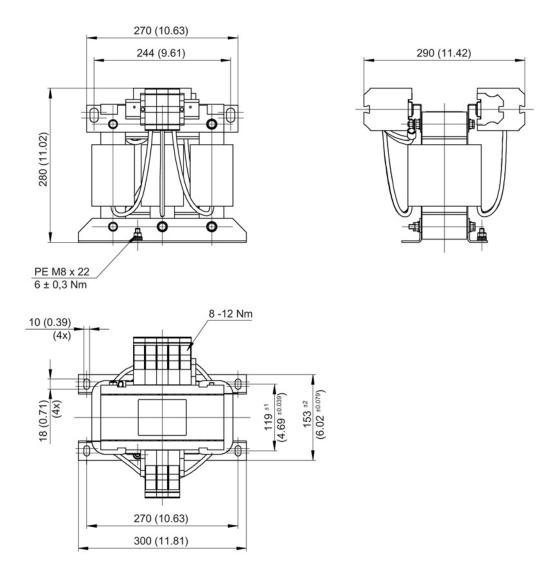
Dimension drawing of line reactor for Smart Line Module 55 kW, all dimensions in mm and (inches)
